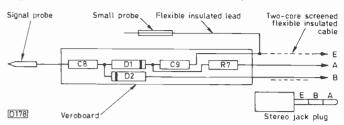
Layout of components on Veroboard inside the r.f. probe. Internal cable wire A connects to the jack tip, wire B connects to the centre section and the screen E connects to the section that goes to "ground".
